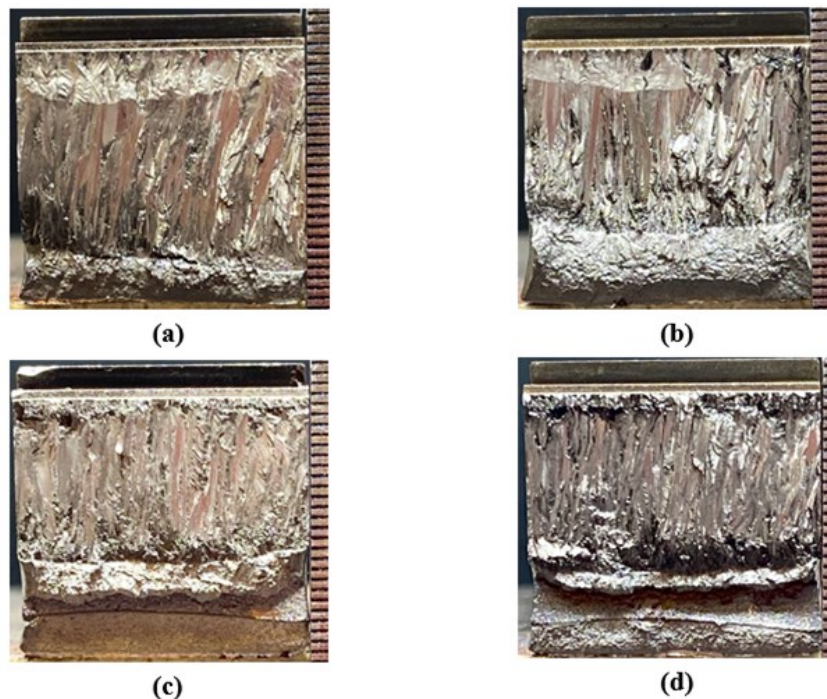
Fracture surface appearance for SE(B) specimens, with $S/W = 8$ and $R = 0.5$ of the Girth Weld (a) ASTM E647 – machined (CP03), b) ASTM E647 – after heat treatment (CP10), c) CPLR – machined (CP07) and d) CPLR – after heat treatment (CP12).
